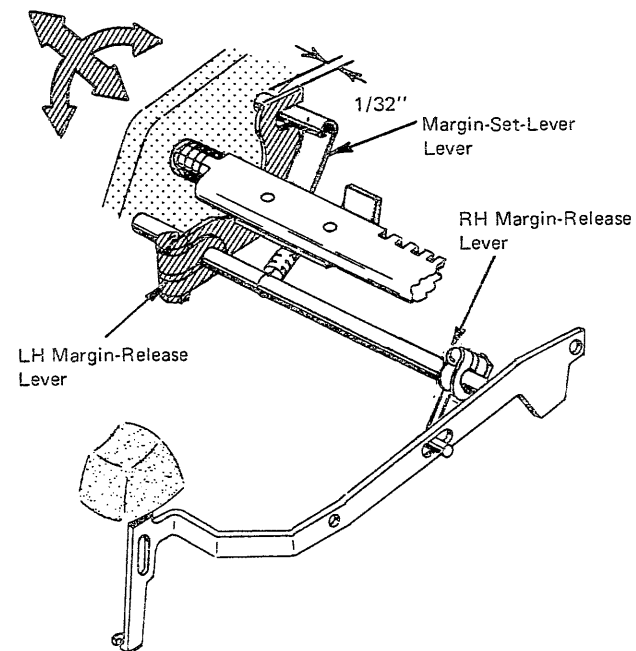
Margin Release, 15-Inch and 767 Machines (Level 2)
